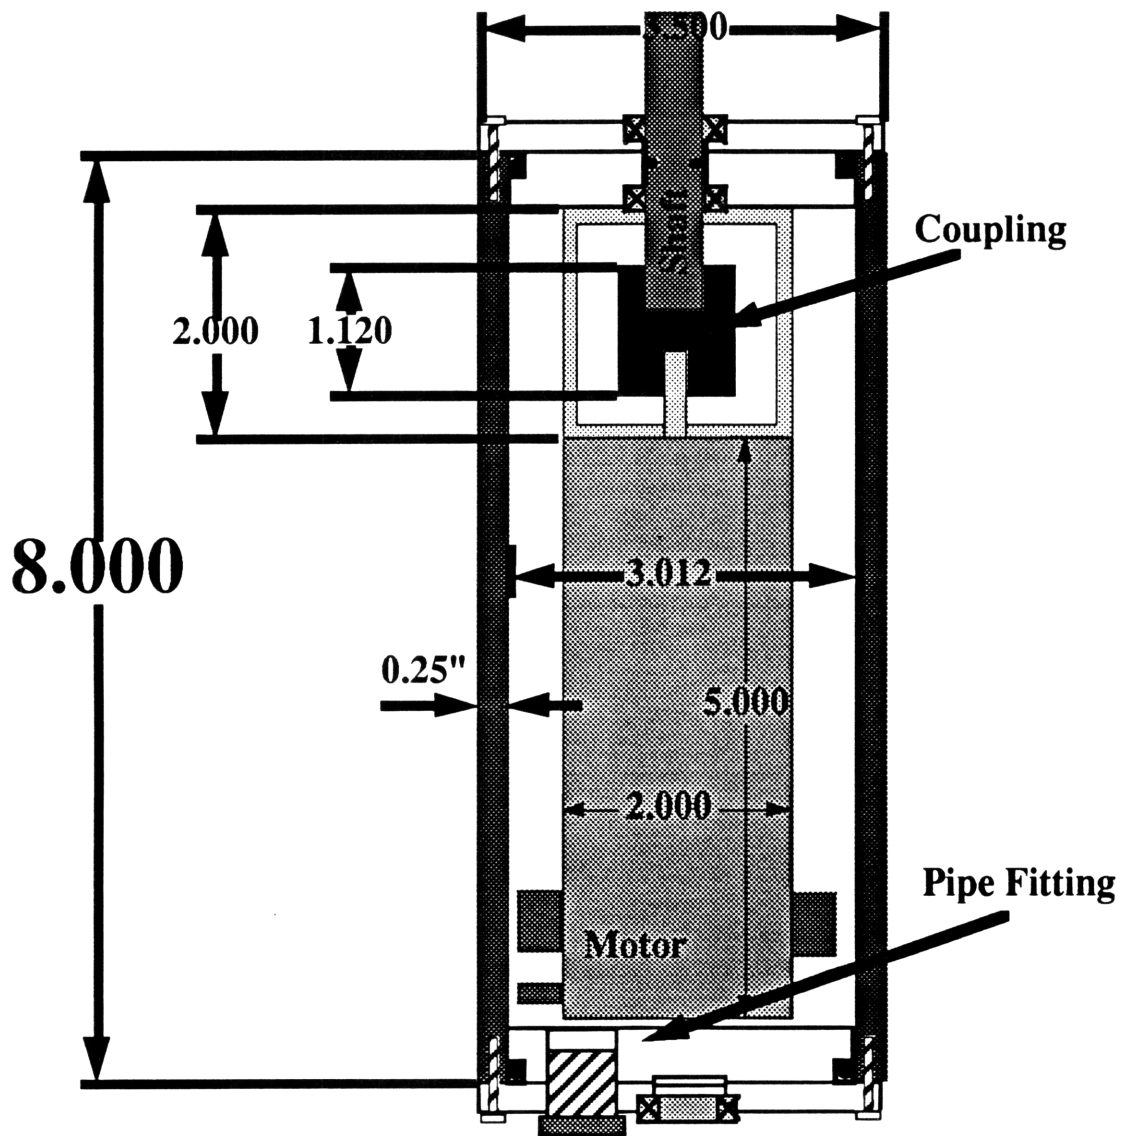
Motor Can Cut-away View *Designed by Paul Stach and Dean Franck. Drawn by Paul Stach. Dimensions are in inches.
